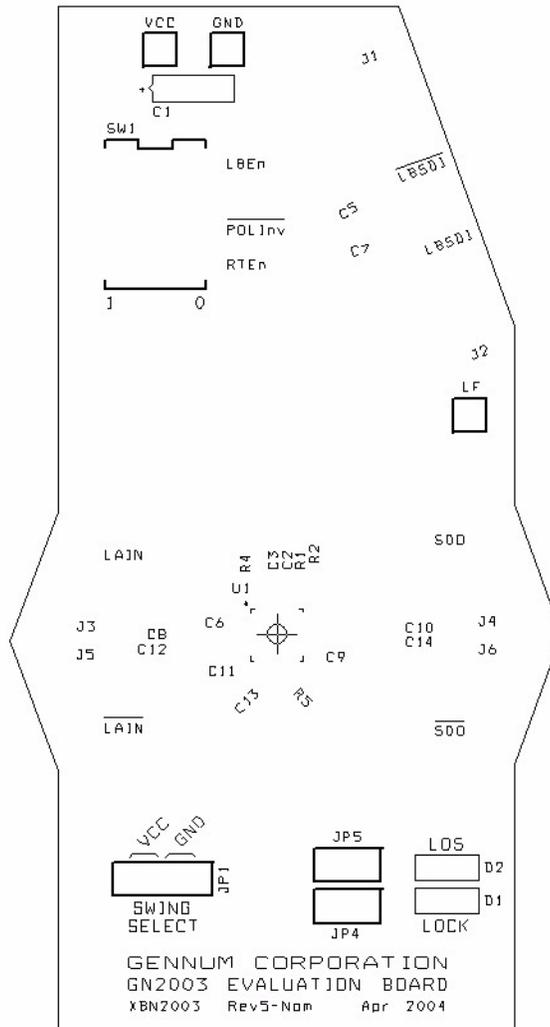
XBN2003 PCB Layout — Top Silk
